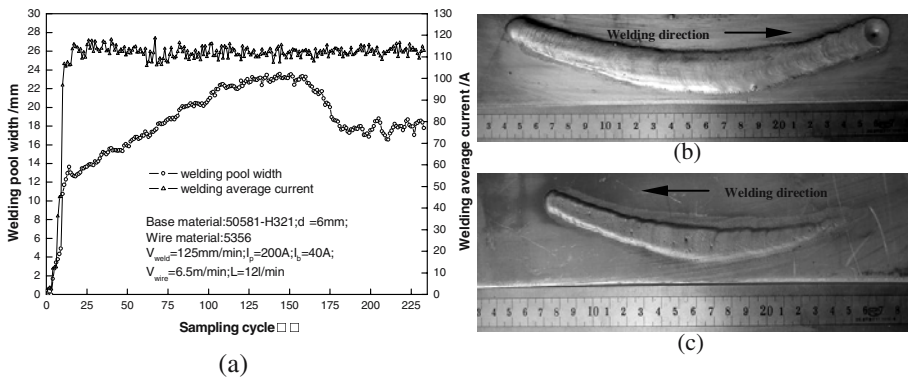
Curves of weld pool width in constant welding parameters (a) and photograph of workpiece with constant welding parameters: (b) Topside; (c) Backside
